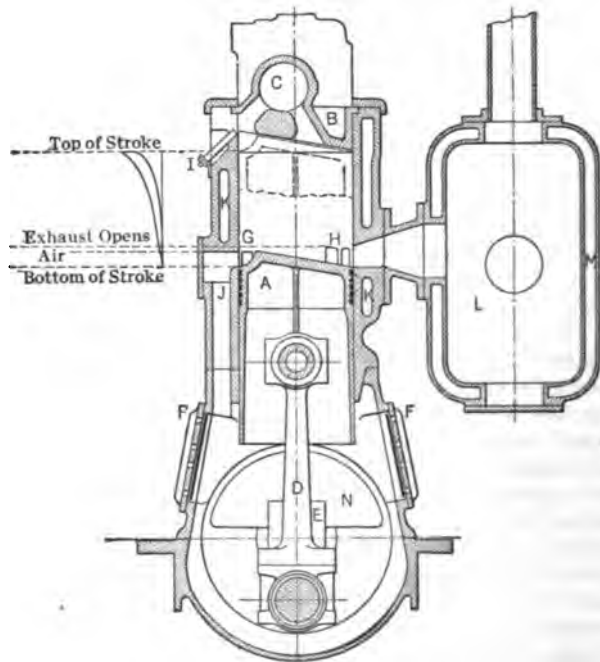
(A) Piston. (B) Cylinder cover. (C) Combustion chamber. (D) Connecting rod. (E) Crank. (F) Air inlet valves. (G) Scavenging air ports. (H) Exhaust ports. (J) Fuel injection nozzle. (J) Scavenging air passage. (K) Water jacket. (L) Exhaust silencer. (M) Water jacket. (N) Balance weight.
